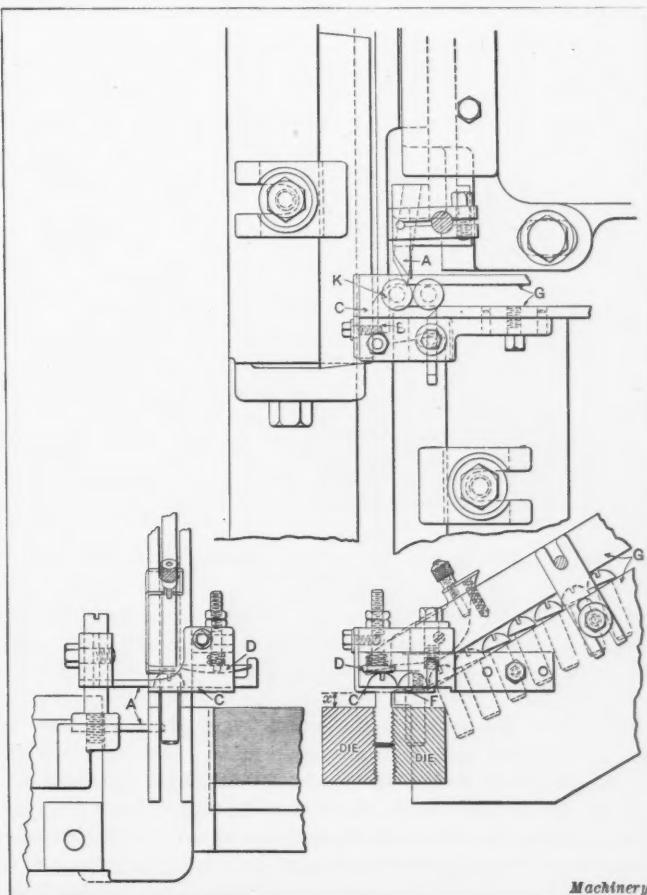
Escapement or Cut-off Mechanism at Lower End of Feed Chute for feeding Blanks One at a Time to Dies
